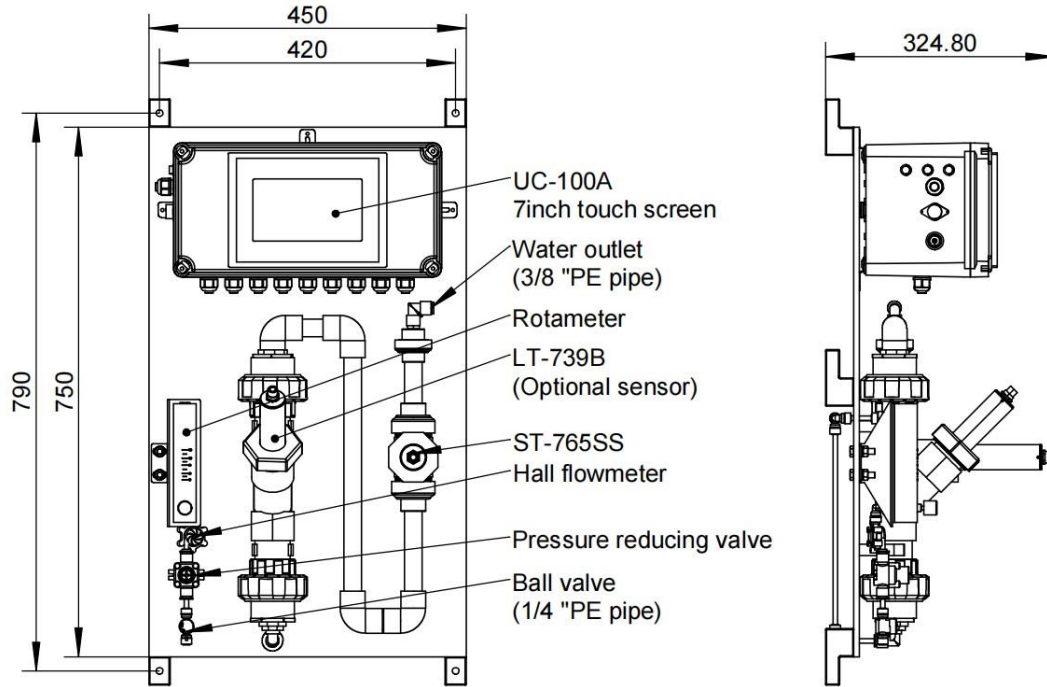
DW-203XP Series Panel Dimensions (mm)
